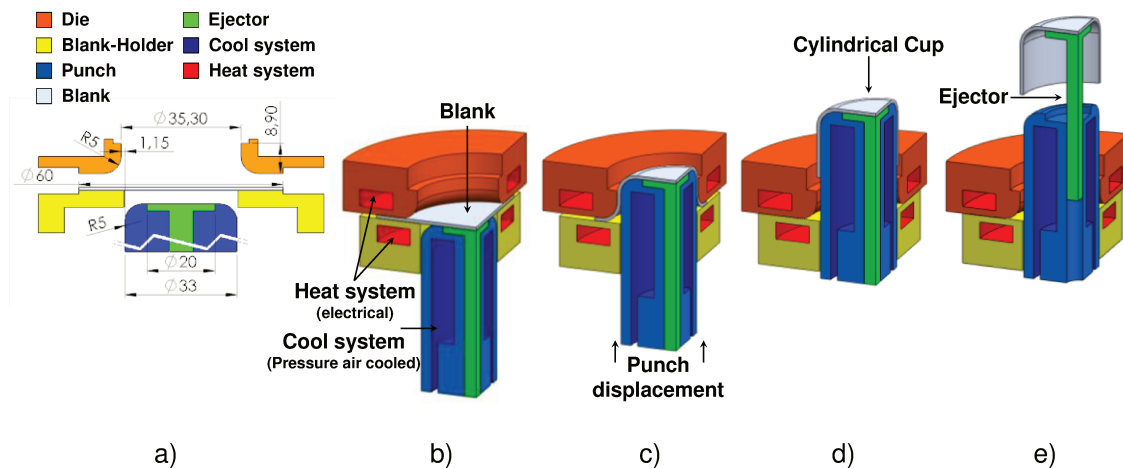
Drawing of a cylindrical cup: a) Tools dimensions (in mm); b) Initial position; c) Cup drawing; d) Punch final position; and e) Ejection step.
